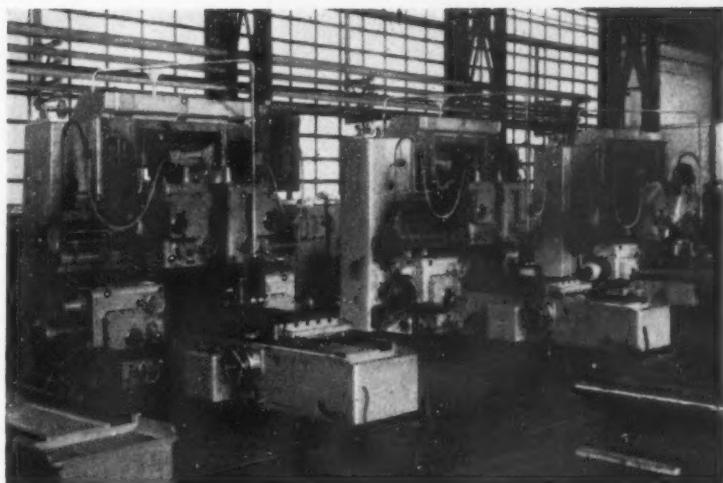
Type FP Plano-milling Machines Under Construction at TOS-Kurim
